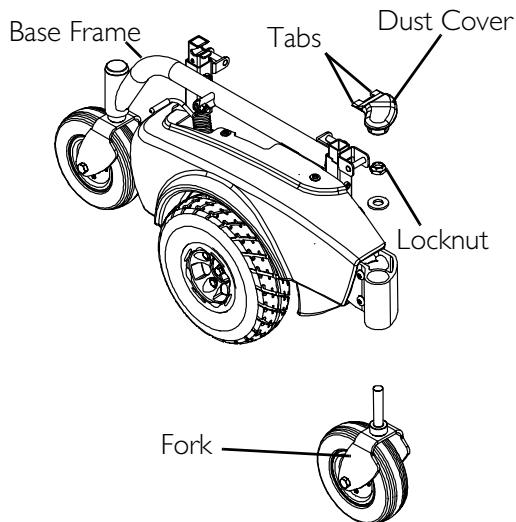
Replacing the Front/Rear Caster Assemblies
